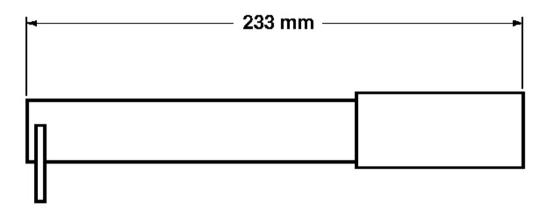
Measuring The Distance From Lower Edge Of Upper Jacket (Manual) Courtesy of GENERAL MOTORS CORP.
